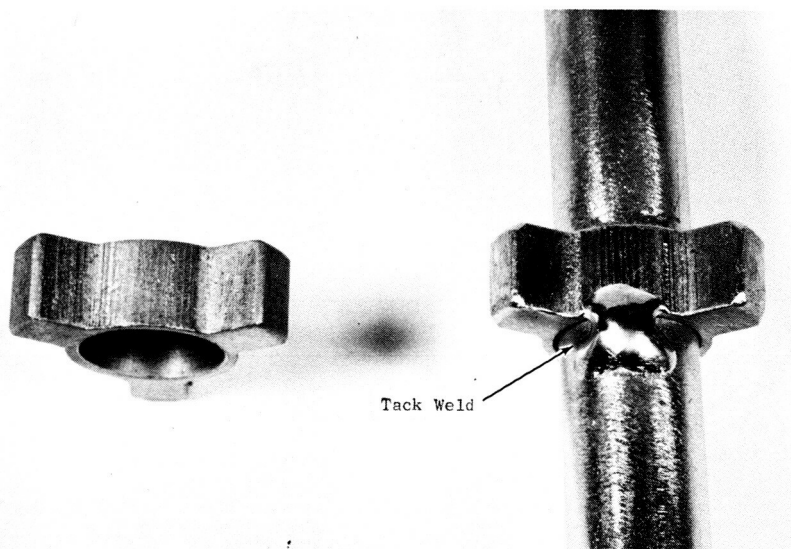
Cb-1Zr boiler tube spacer before and following attachment to 0.375-inch Cb-1Zr potassium containment tube by welding.
